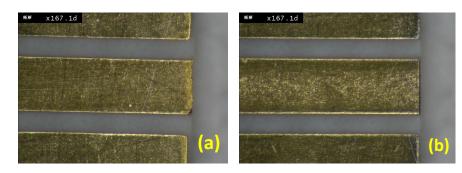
Test board transmission line: (*a*) rough edge (before cleaning), (*b*) smooth edge (after cleaning)
